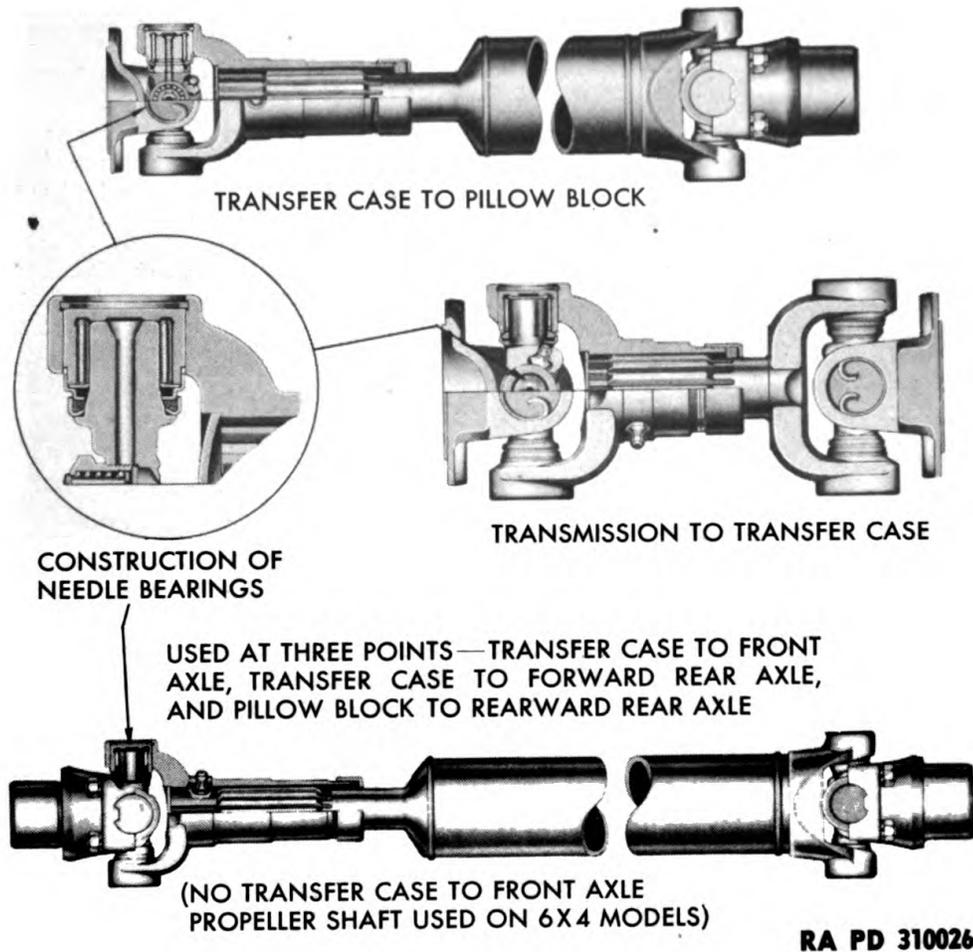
Spicer-type Propeller Shafts and Universal Joints
